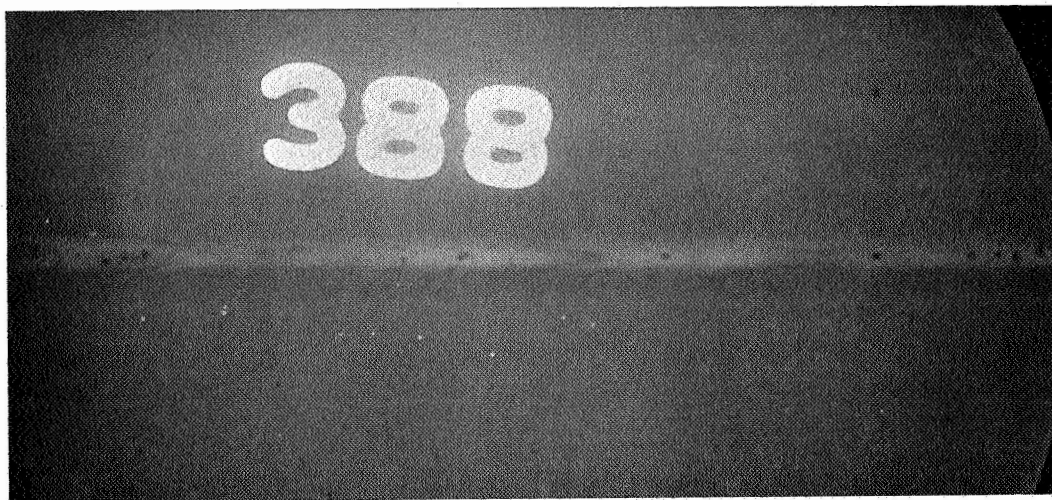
Out-of-Vacuum Electron Beam Weld in 1/4 in. 2219-T87 Aluminum.
